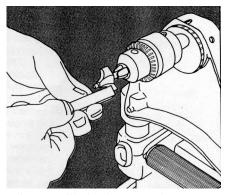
Drill chuck mounted on tailstock chuck arbor to hold router bits while sharpening.
